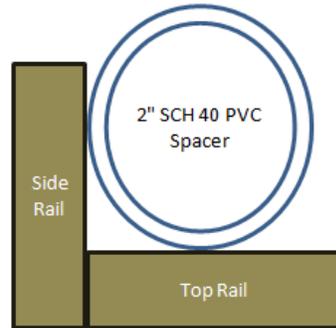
Cross section of Rail assembly with 2" SCH 40 Pipe "spacer" in place.
